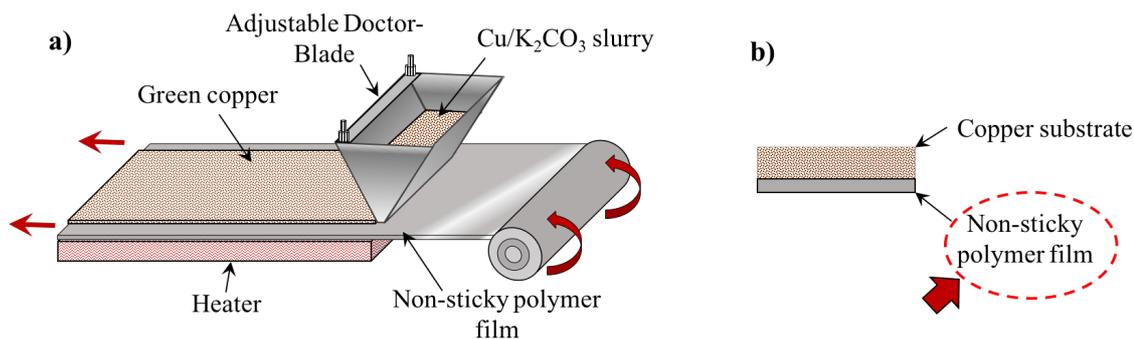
Schematic diagram of the tape casting process, a) a viscous slurry inside the hopper directly tape cast on to a moving dense copper substrate through an adjustable doctor blade, and b) double-layered green tape before debinding and sintering.
